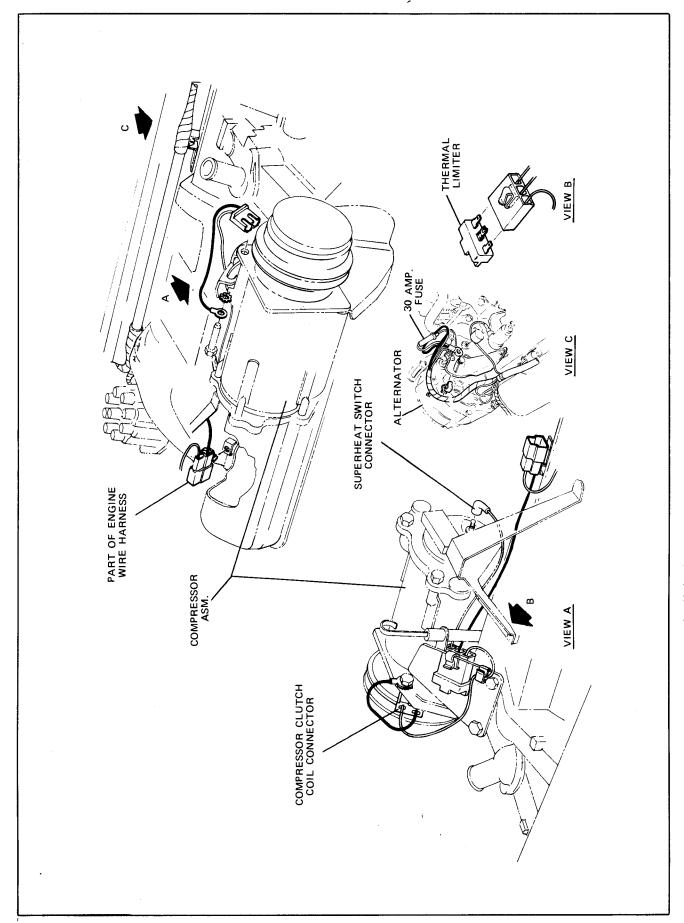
A-142 A/C Compressor (Engine) Wire Harness Routing - V-8 Engine (Except 307)
